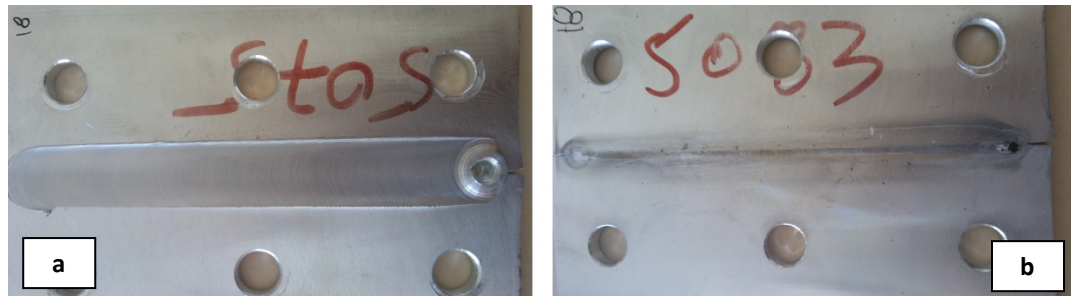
(a) Top and (b) Bottom view of dissimilar weld 5083-H111 and 7075-T651
